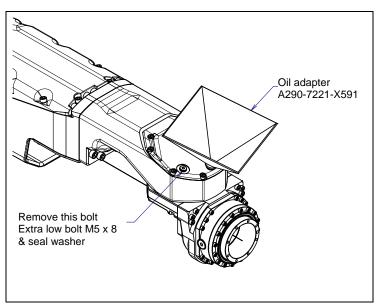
(e) Oil adapter (supplying oil J5/J6-axis gearbox)
